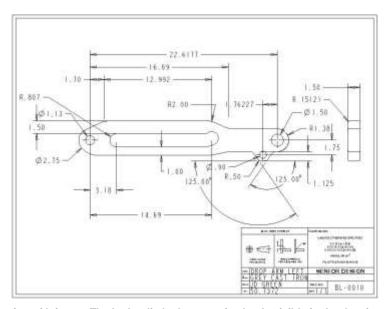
Detailed drawing of left arm. The hydraulic lock groove is clearly visible in the drawing. Also holes for the pins of the locking mechanism, the hydraulic cylinder, and the weight hook are clearly displayed.
